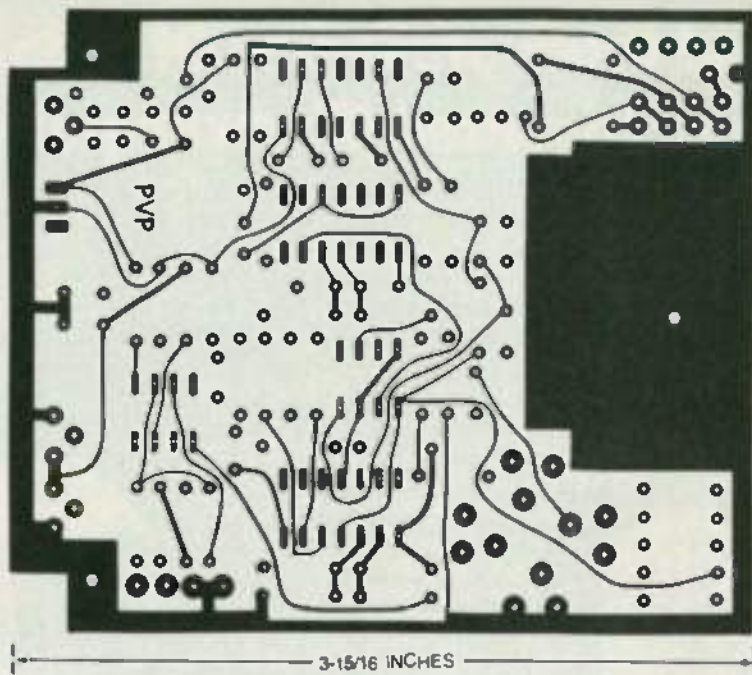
THE COMPONENT SIDE of the double-sided display PC board. It, too, is shown full sized.
